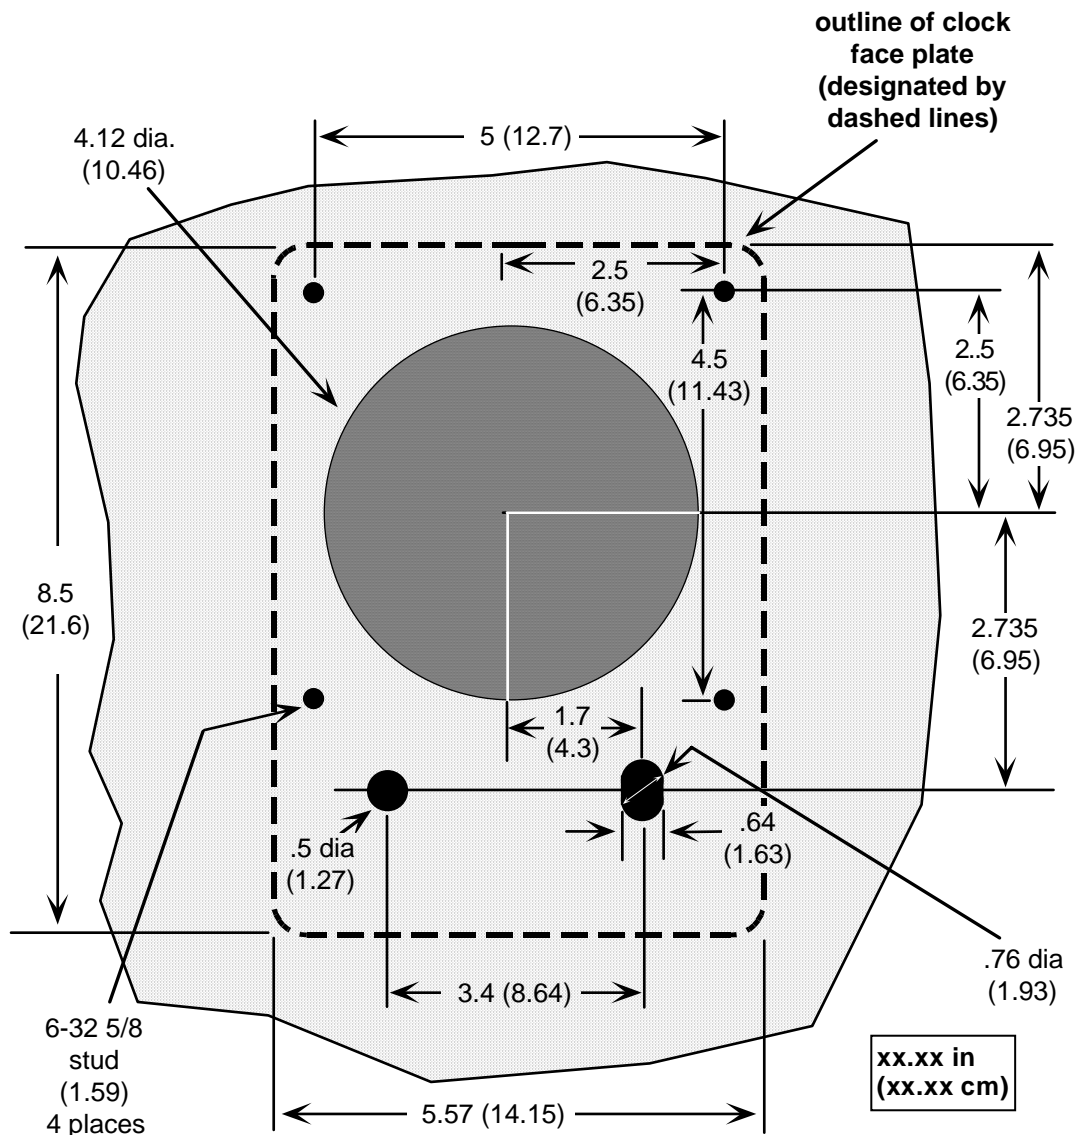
Clock display kit mounting and cutout dimensions (allow ± 4 " clearance)
